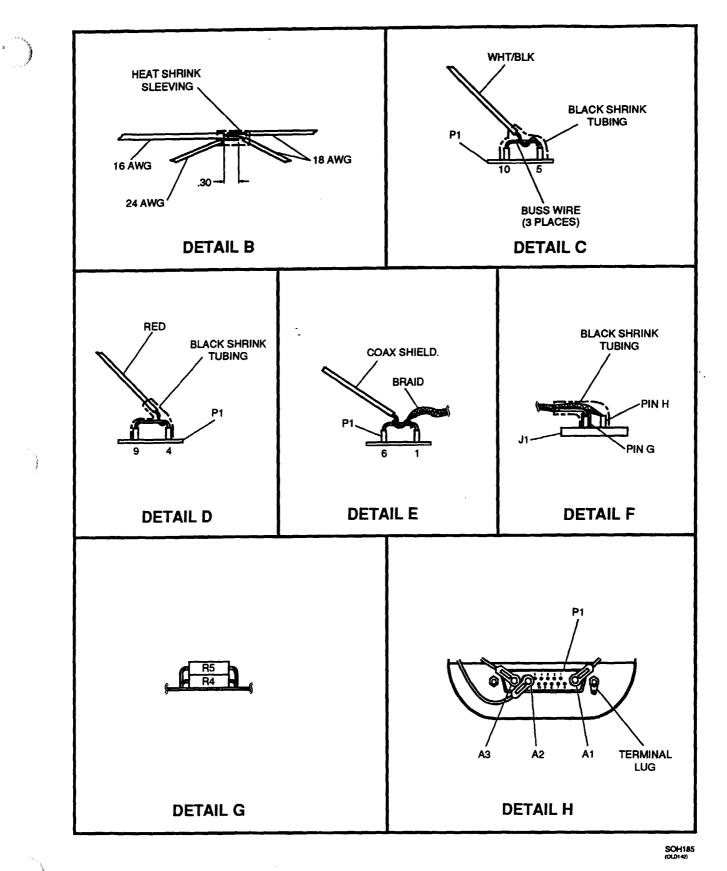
Disassembly of the A13 Power Amplifier Board (Sheet 3 of 3)
